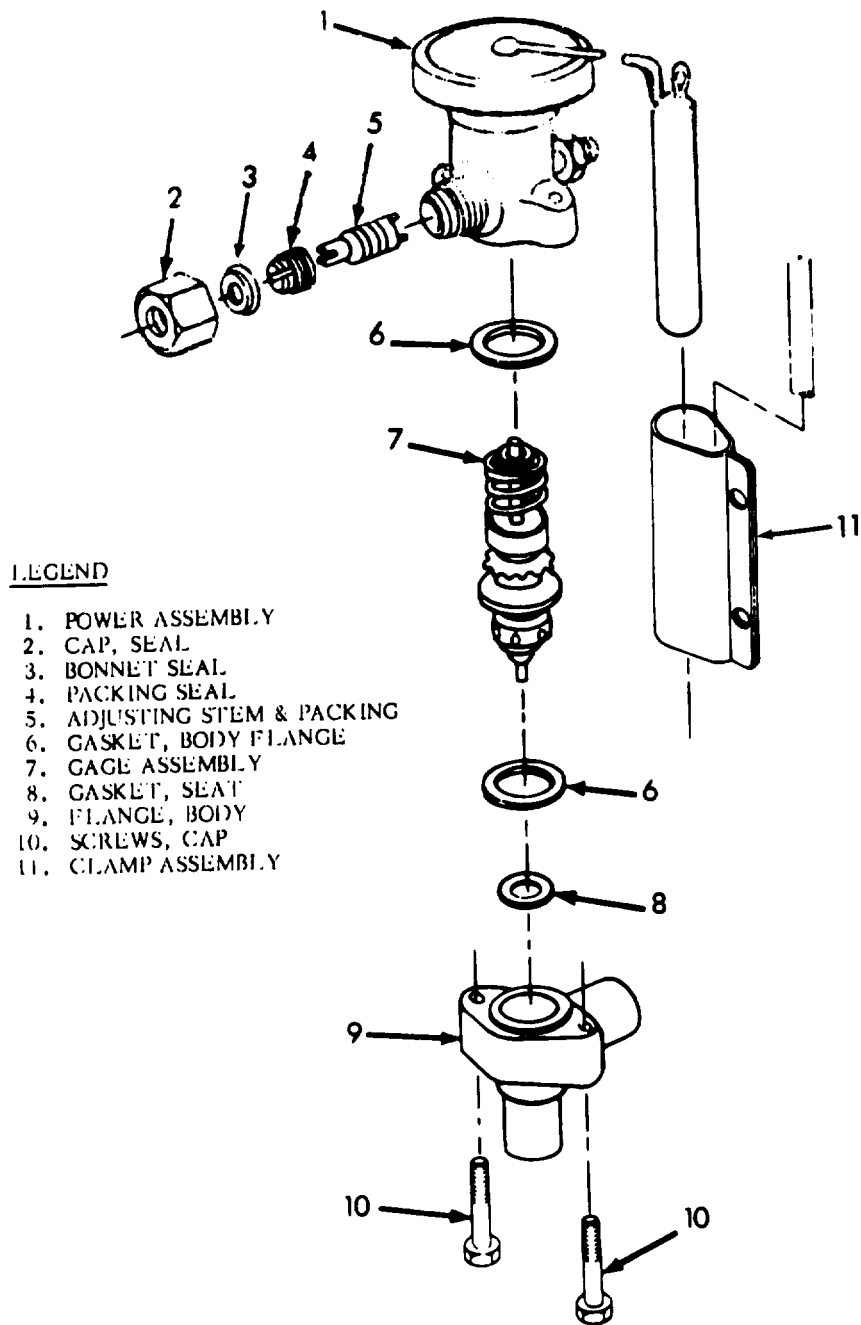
Typical Therma<sup>1</sup> Expansion Valve
